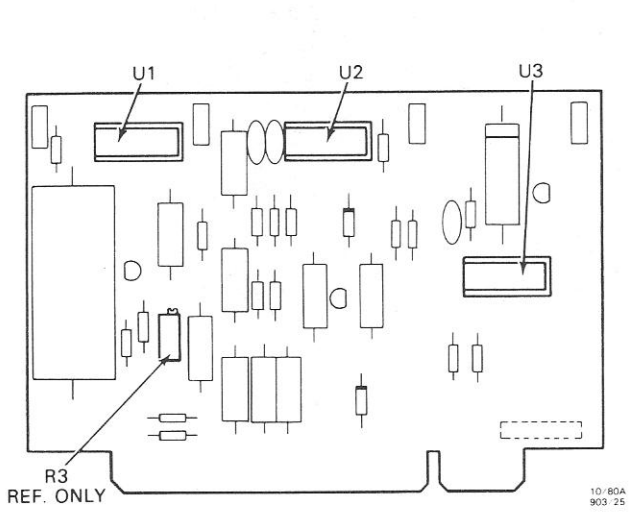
Voltage-to-Frequency Converter Assembly.
